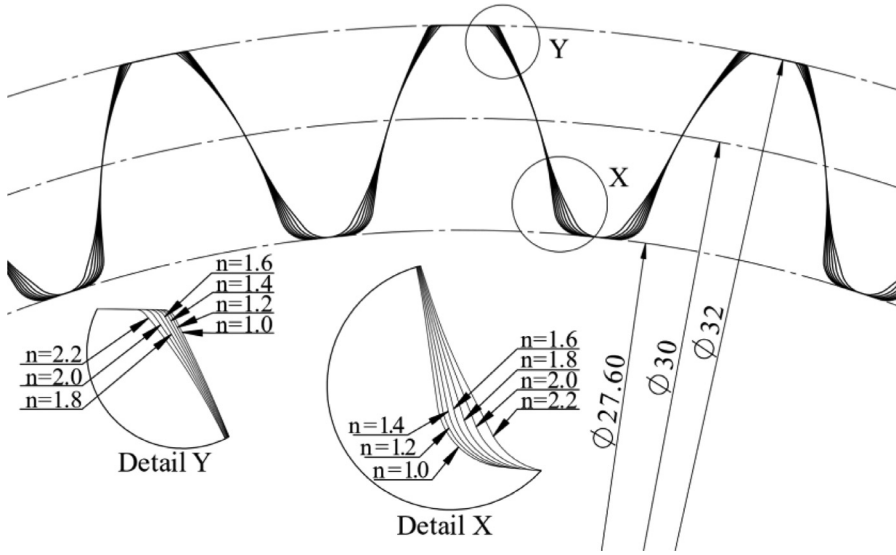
Shape of the tooth dependent on z and n for a gear with 30 teeth and module 1 mm.
